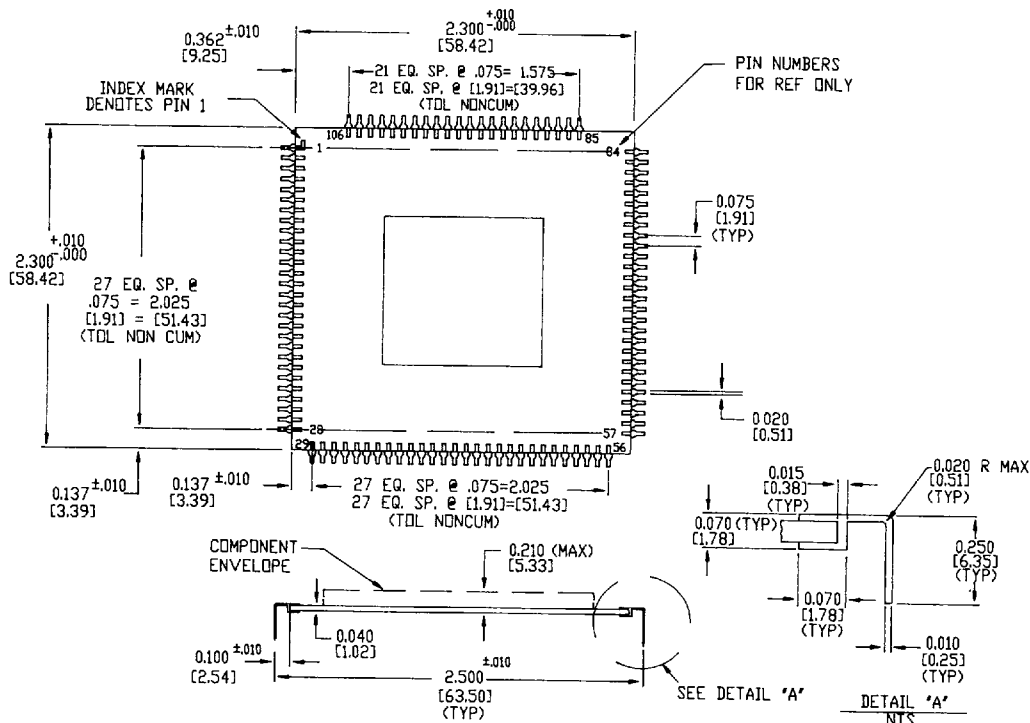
DD-03232 PLUG-IN PACKAGE MECHANICAL OUTLINE
